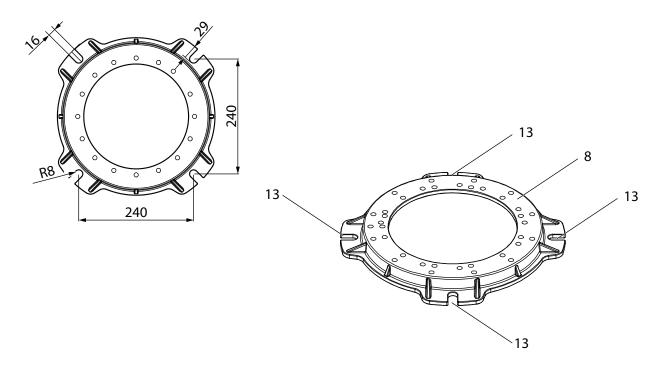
Mechanical installation – mounting base – example (dimensions in mm)
